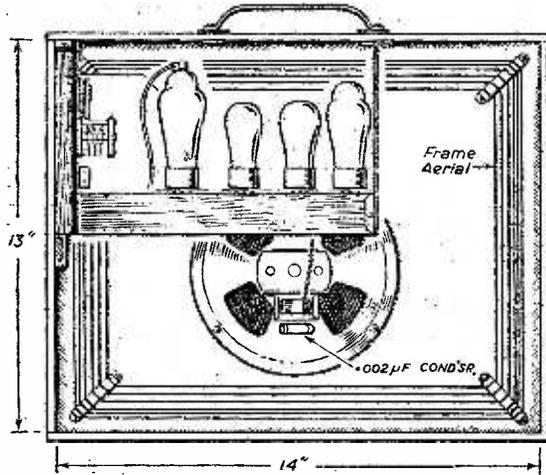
Details of the frame cabinet, and mounting for chassis.
